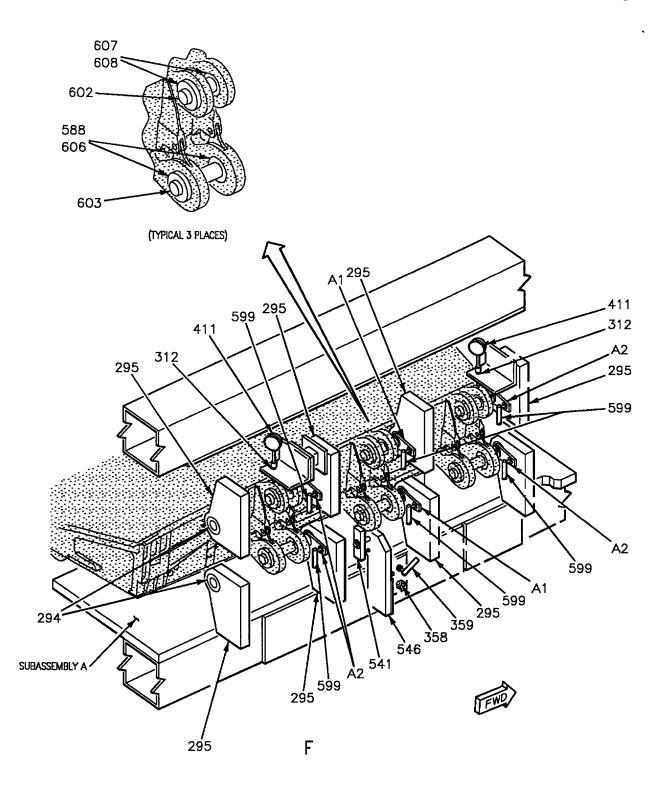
Inner Wing Attach Lugs (Sheet 4)
